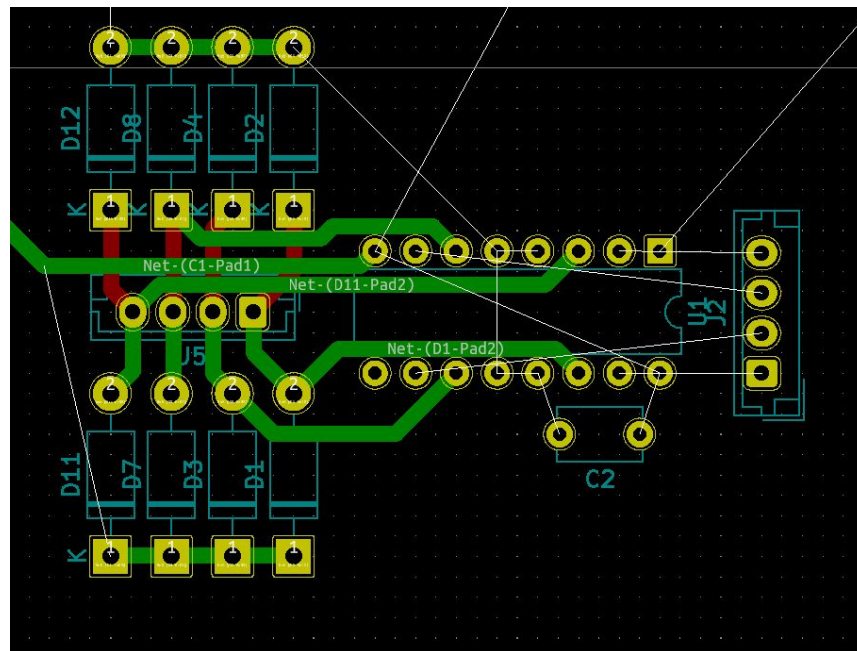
Trace view of the first PCB design. Notice the poor layout of components, long traces, excessive vias necessary, and ridiculous daisy-chained power supply with slim traces.
